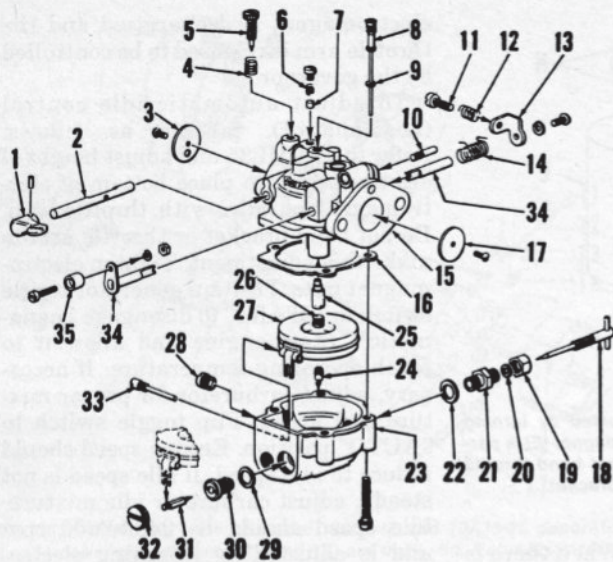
Exploded view of typical Tillotson Series MD carburetor as used on some Homelite pump models.
